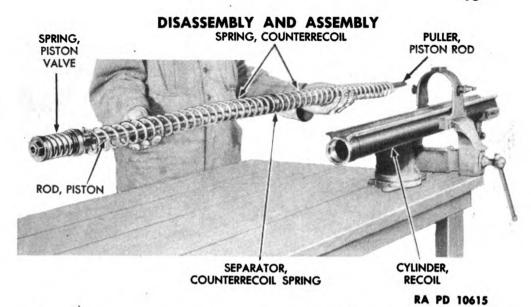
Removing the Counterrecoil Springs and Allied Parts
